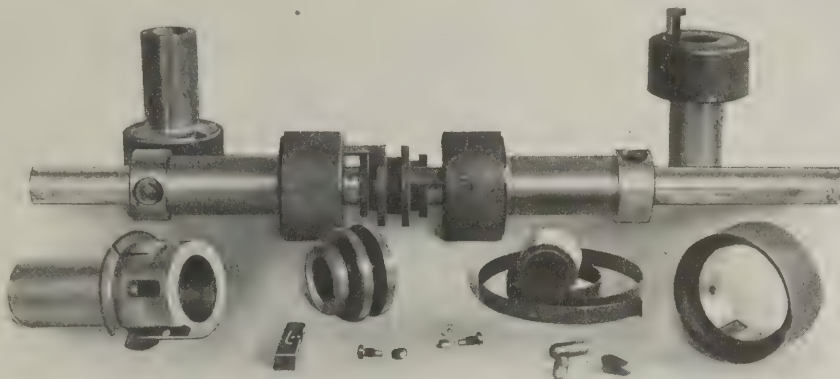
View showing Single and Double Bicknell-Thomas Clutch and Component Parts
